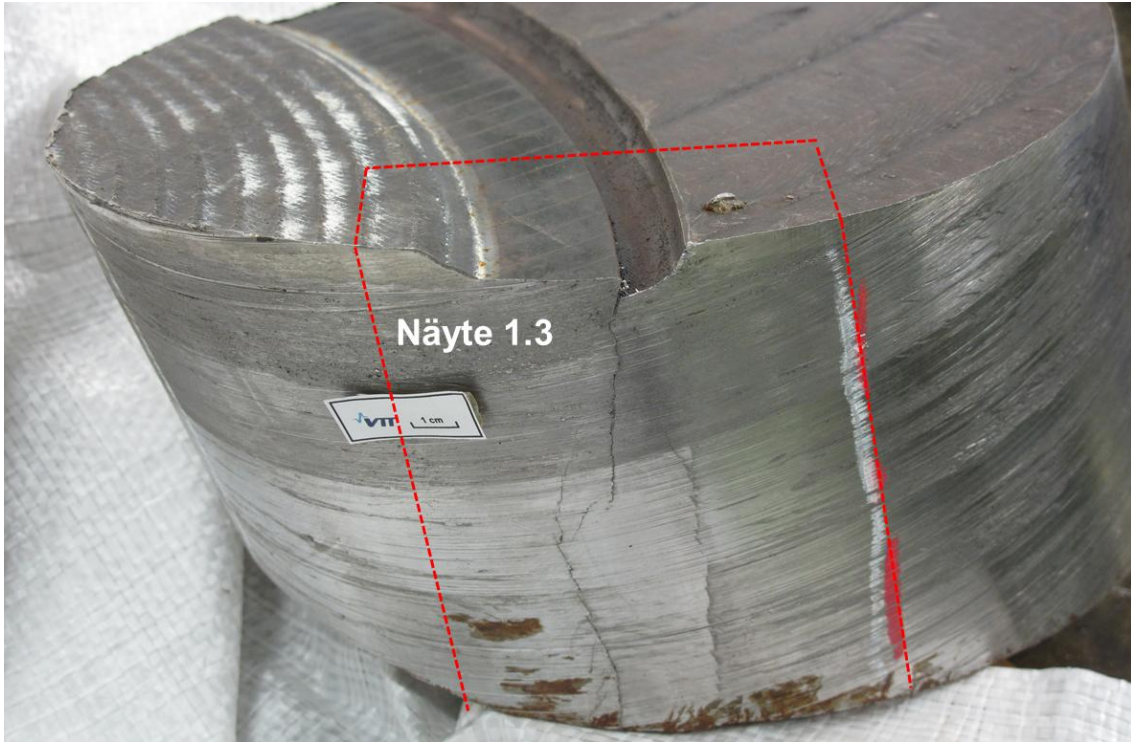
Longitudinal weld metal/HAZ cracks initiated from the corner of a machined notch at the inner surface (see: the top side) and grown into the weld mid-thickness area and finally the outer surface.
